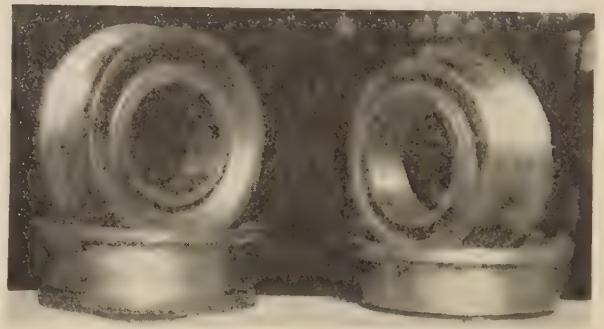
TRACK-WHEEL RIMS FOR CRAWLER-TYPE TRACTORS
